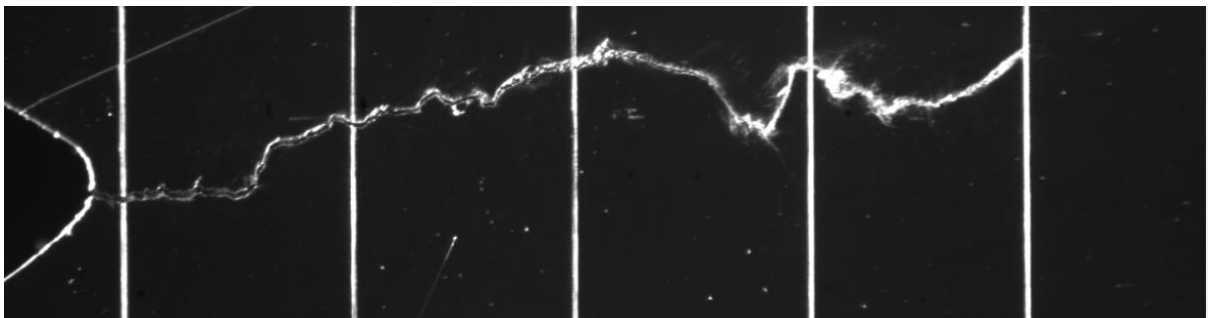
XY3 fatigue crack (to failure)
